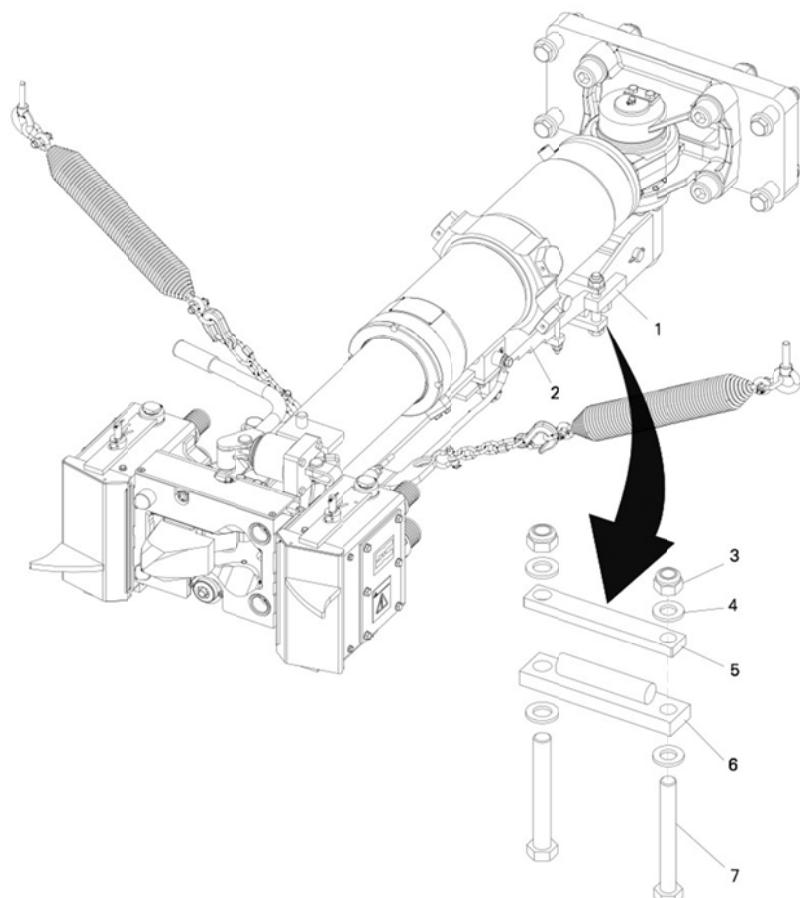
SUPPORT SPRING ASSEMBLY LOCK NUT REPLACEMENT
